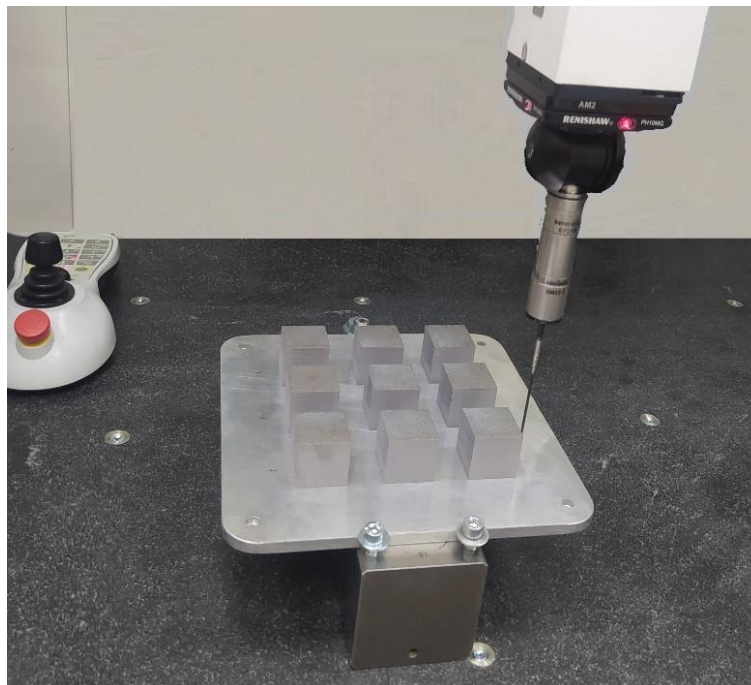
Geometrical dimensions and tolerances assessment
